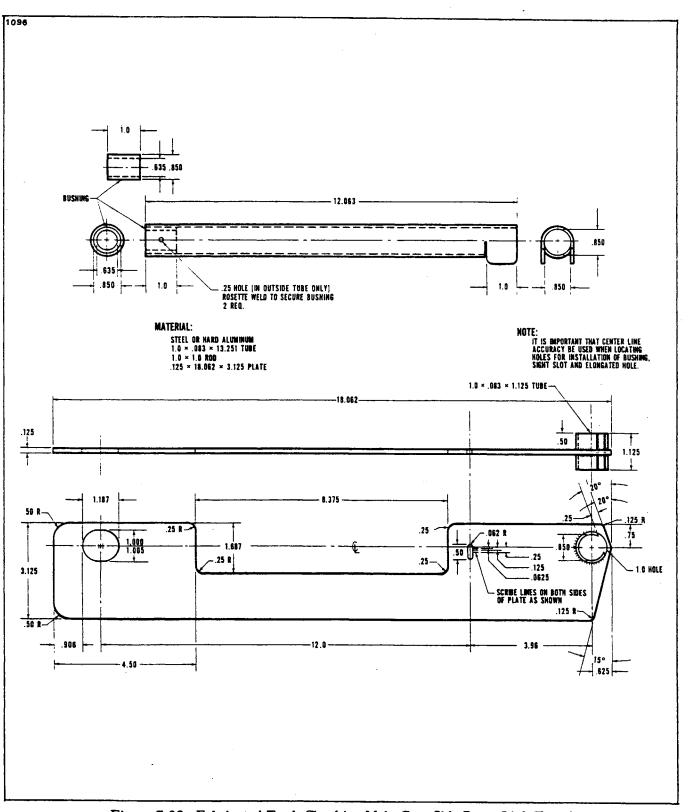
Fabricated Tool, Checking Main Gear Side Brace Link Travel
